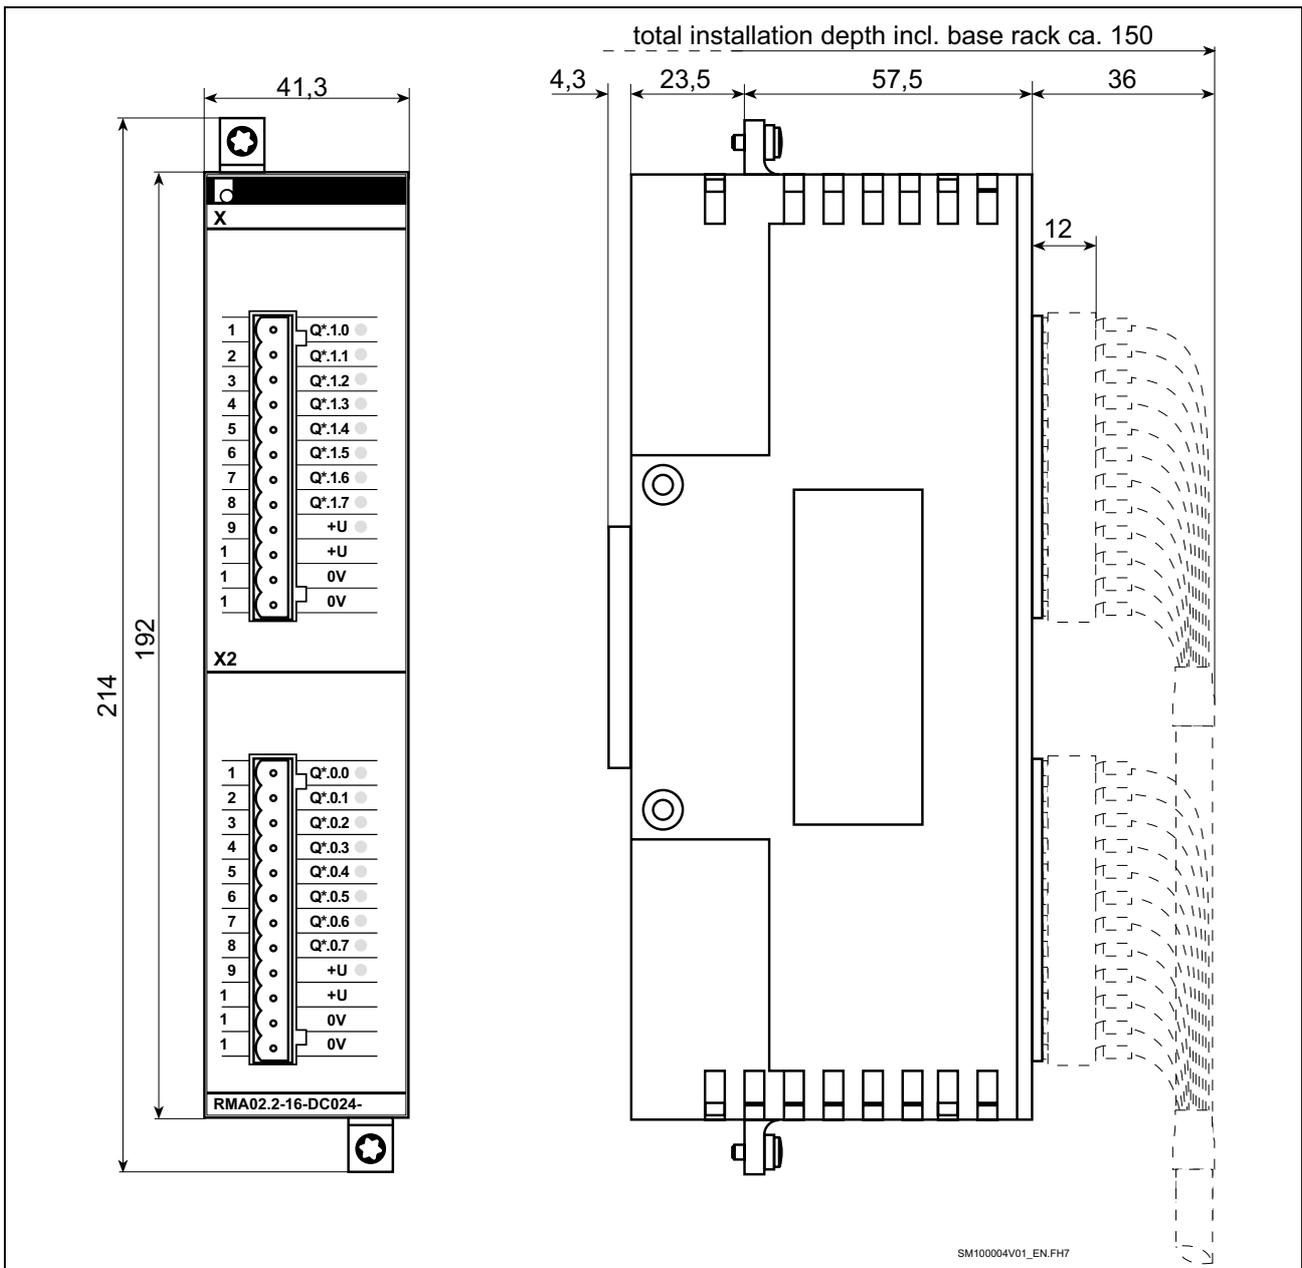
Dimensional sheet RMA02.2-16-DC024-200
